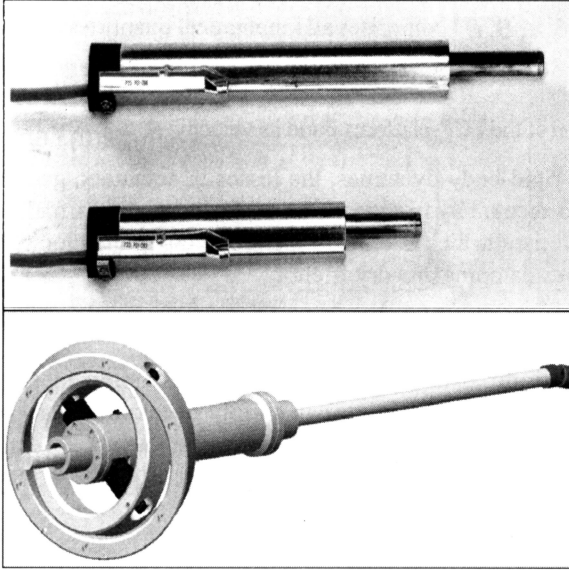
Single Strut with Integrated Linear Drive and Cardan Joint
